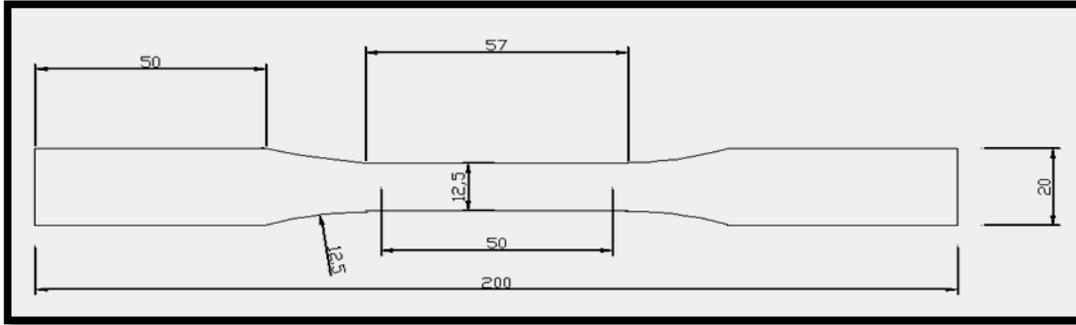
The dimensions of the tensile test specimen according to ASTM standard E8M specification.
